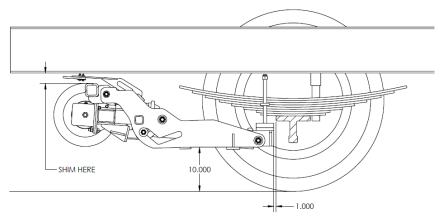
Cam at 10" and parallel to the ground and spring hangers set 1" in front of the axle. In this figure the mounting beam is oriented towards the front of the chassis.
